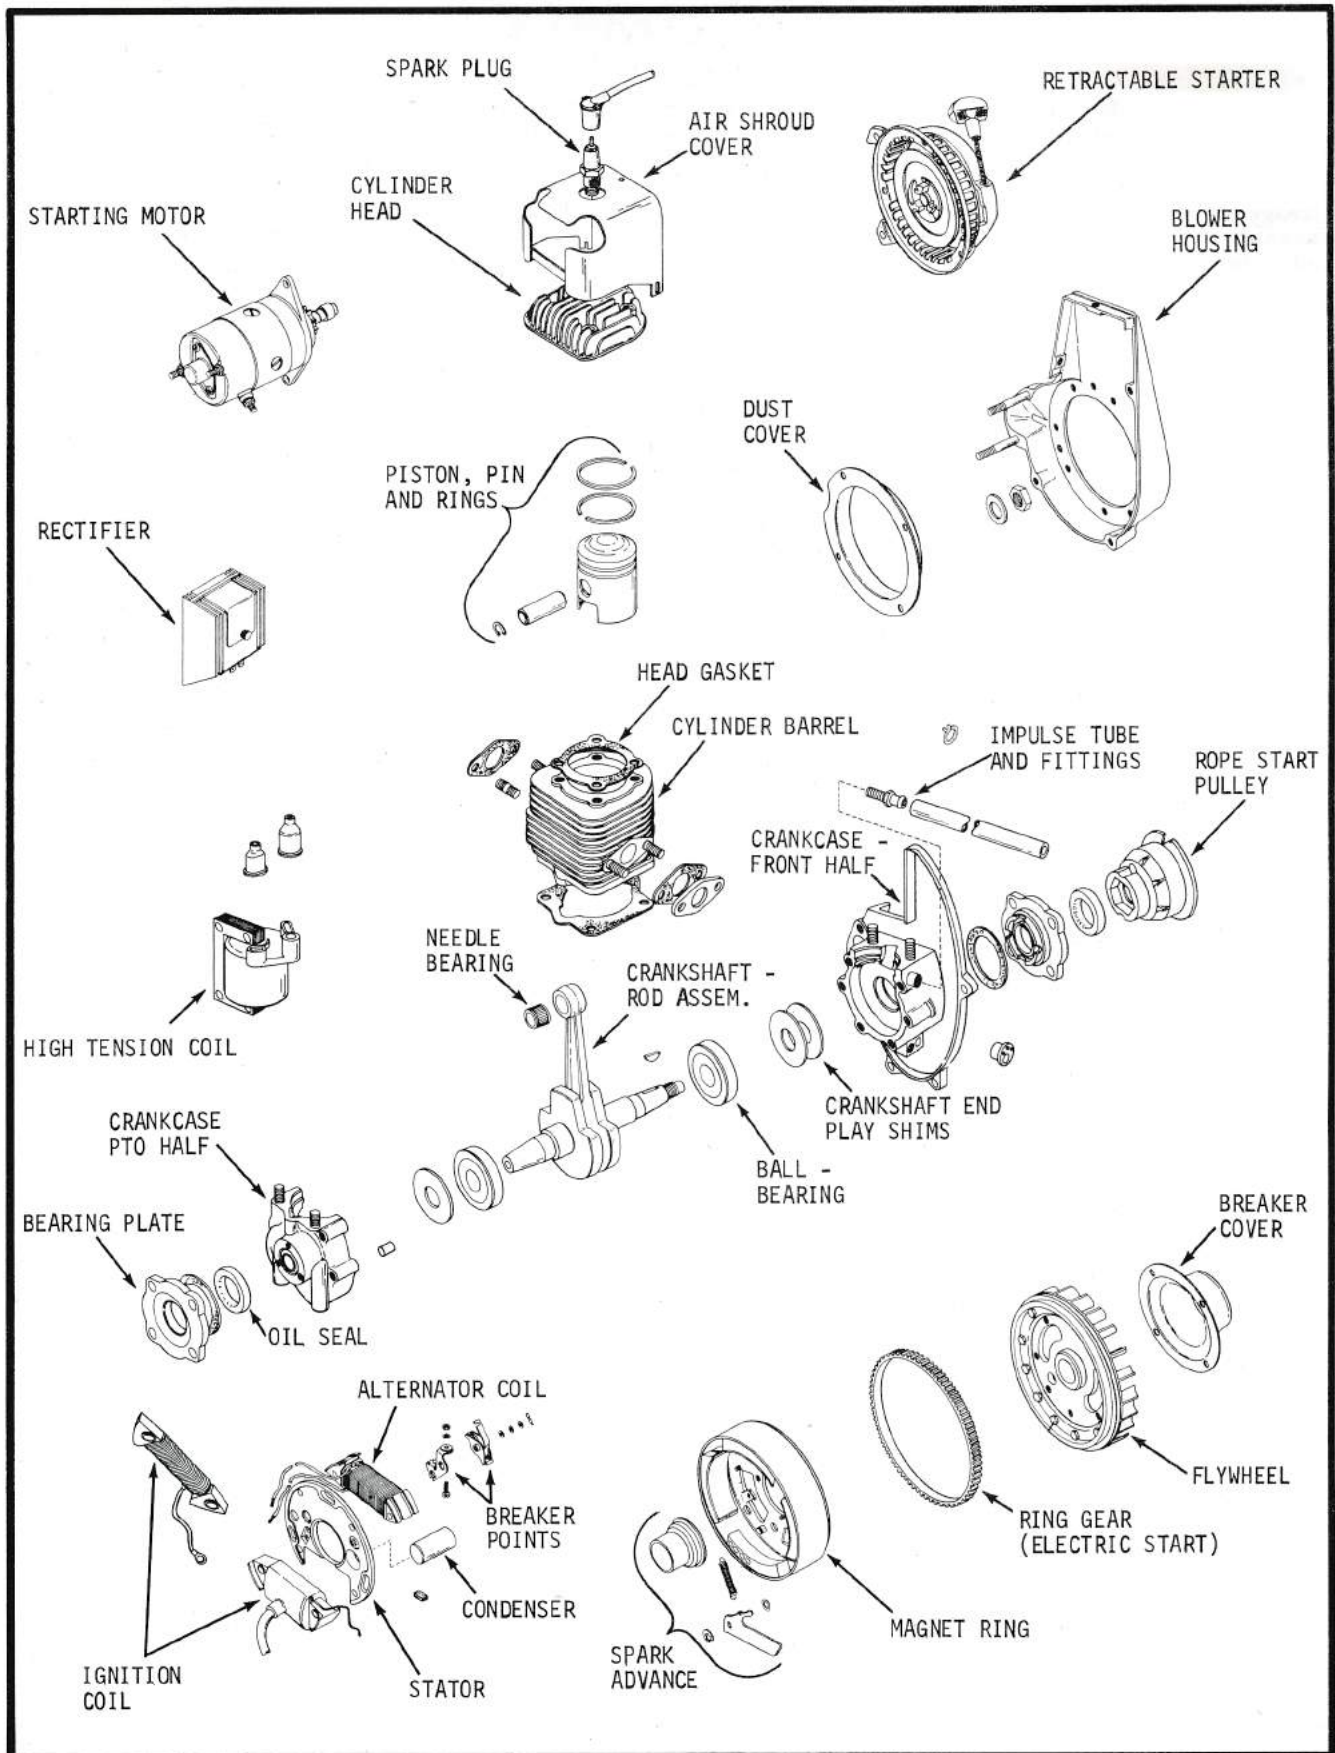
EXPLODED VIEW OF SINGLE CYLINDER TWO CYCLE ENGINE
